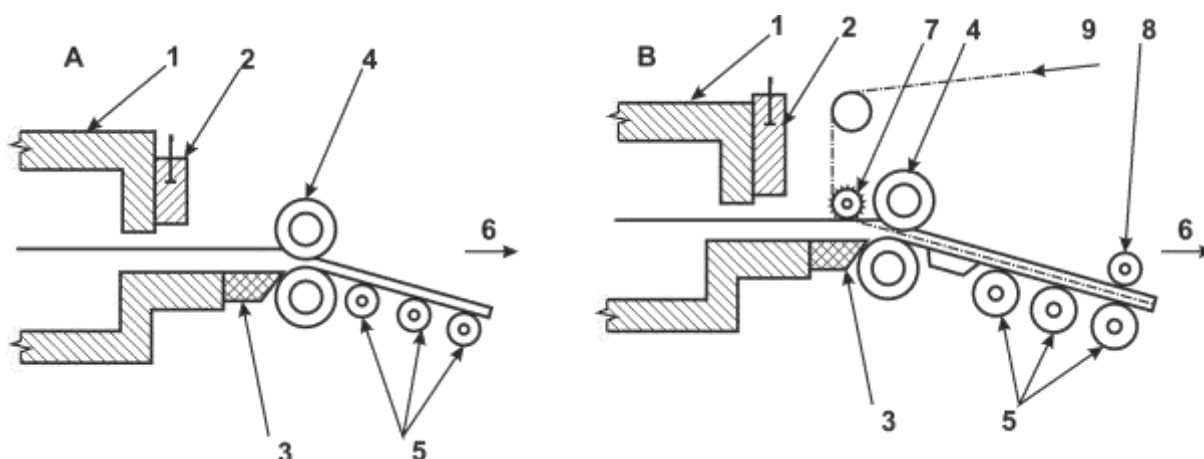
Diagram of continuous rolling (casting) of flat glass: A - rolling machine with the same size of forming rolls, B - rolling machine with adjustment for introduction of wire insert, 1 - working end of melting unit, 2 - shutter, 3 - seal block, 4 - casting rolls (hollow, water cooled), 5 - rollers of the shoot path, 6 - annealing furnace, 7 - wire insert loading element (grooved roll), 8 - polishing roll, 9 - wire mesh
